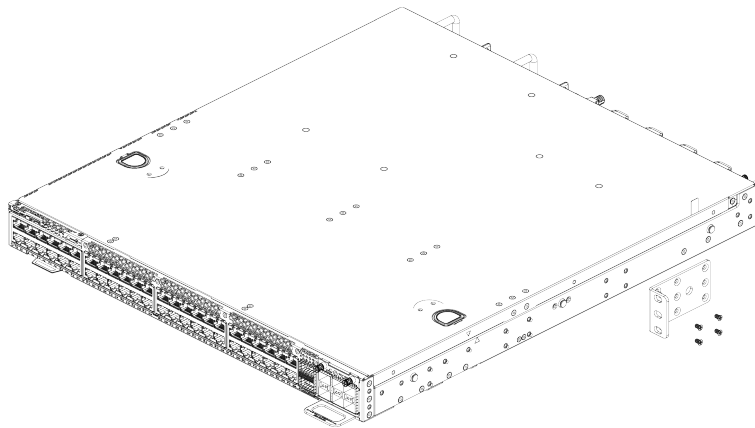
Attaching a Short Mounting Bracket (Ear): Middle of Switch
